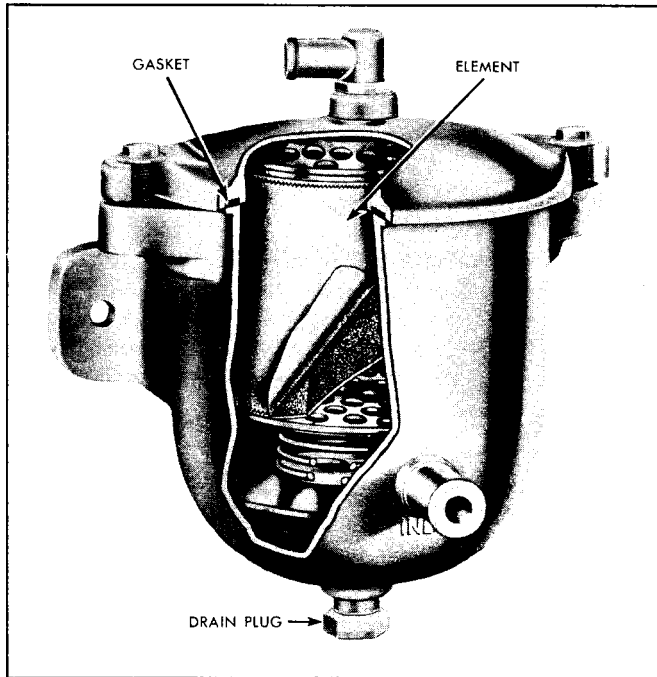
Coolant Filter and Conditioner (Canister Type)
